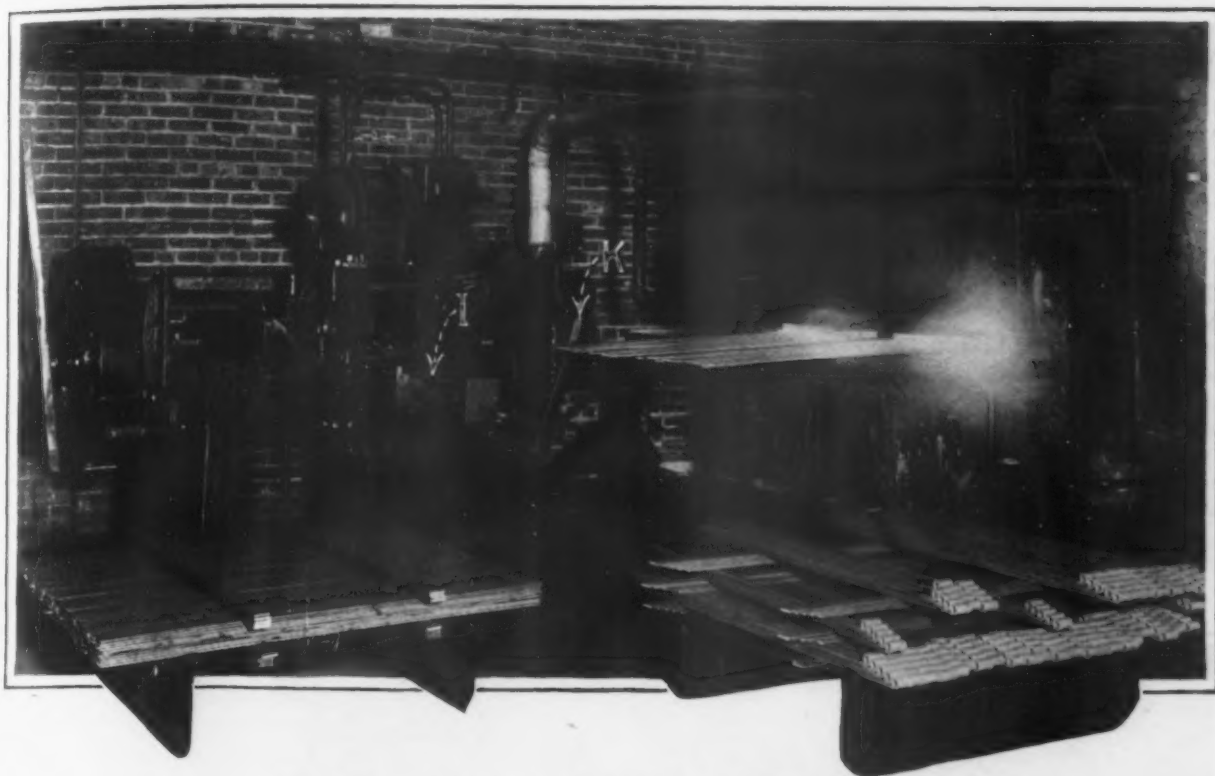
Forming the Eyes by Means of a Single-Stroke Machine
